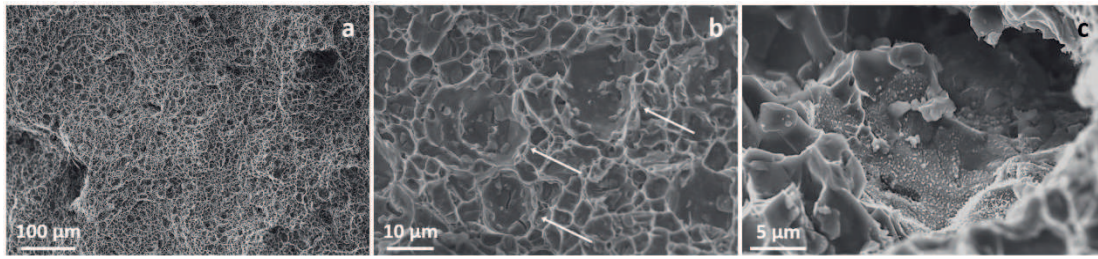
Fracture surfaces of the sample after T6 heat-treatment. (a) Panoramic view of the surface with a dimple-like appearance. (b) Coarse dimples, the arrows mark pores. (c) Detailed image of a pore with possible surface oxides.
